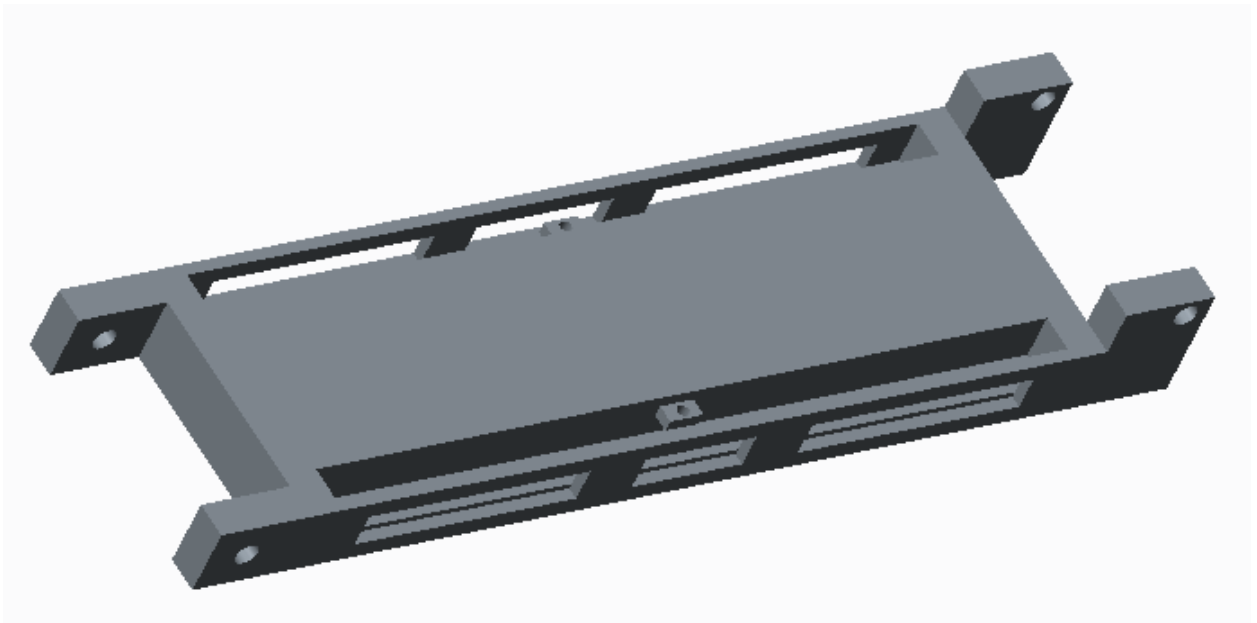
CAD drawing of the base of th coating machine for desing concept #1
